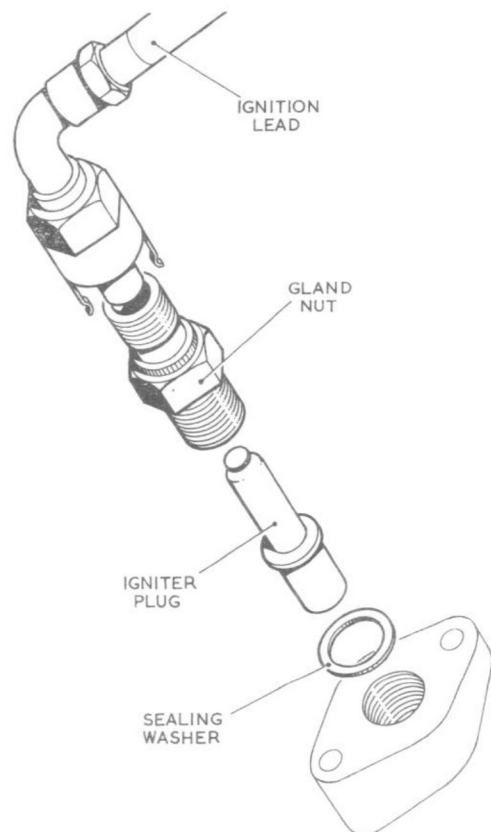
Removing the igniter plug (Pre-Mod. M101)
